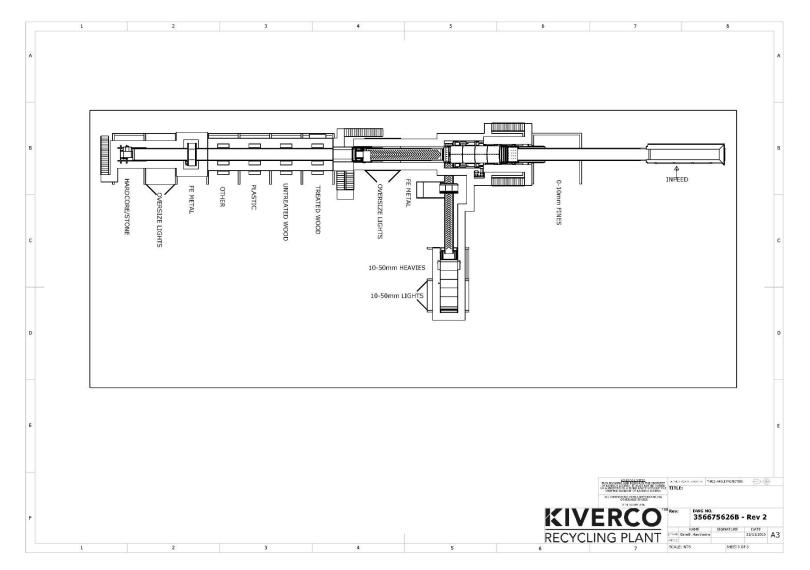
Site layout for the Kariong Sand and Soil Supplies development. Note that detailed site and civil design plans are given in Appendix E.
